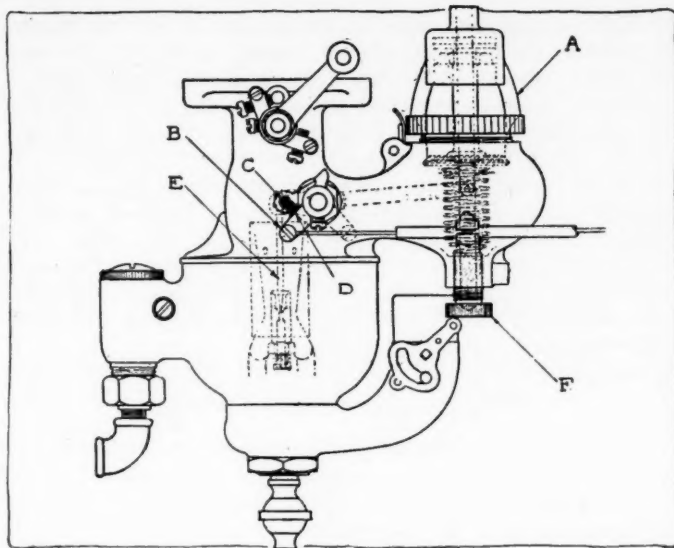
Adjustment diagram of Schebler carburetor used on 1916 Studebaker four-cylinder model
